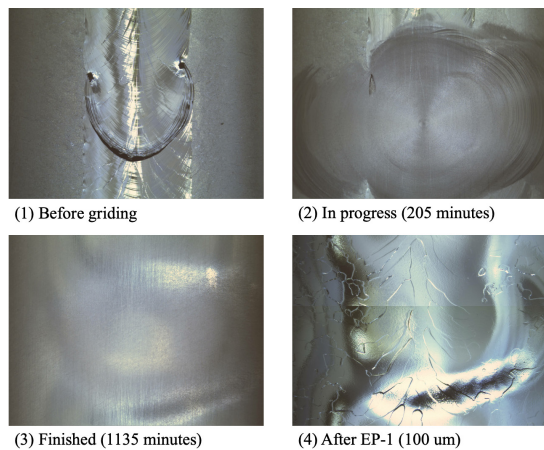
The pictures of welding defect in each steps of local grinding.
